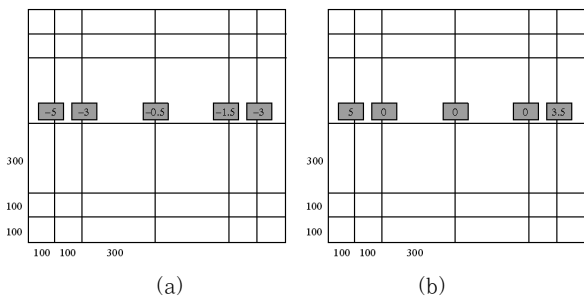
Longitudinal bending distortion of experimental model, in mm (a) front side 1 layer-welded specimen, (b) backside 1 & 2 layer-welded specimen
